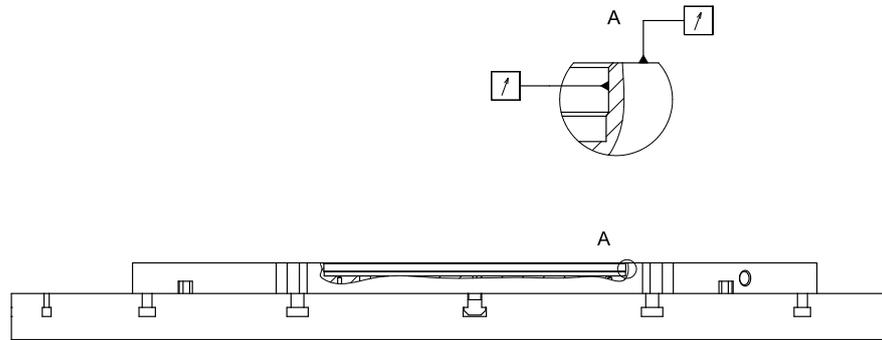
Checking concentricity and axial run-out of the base plate
